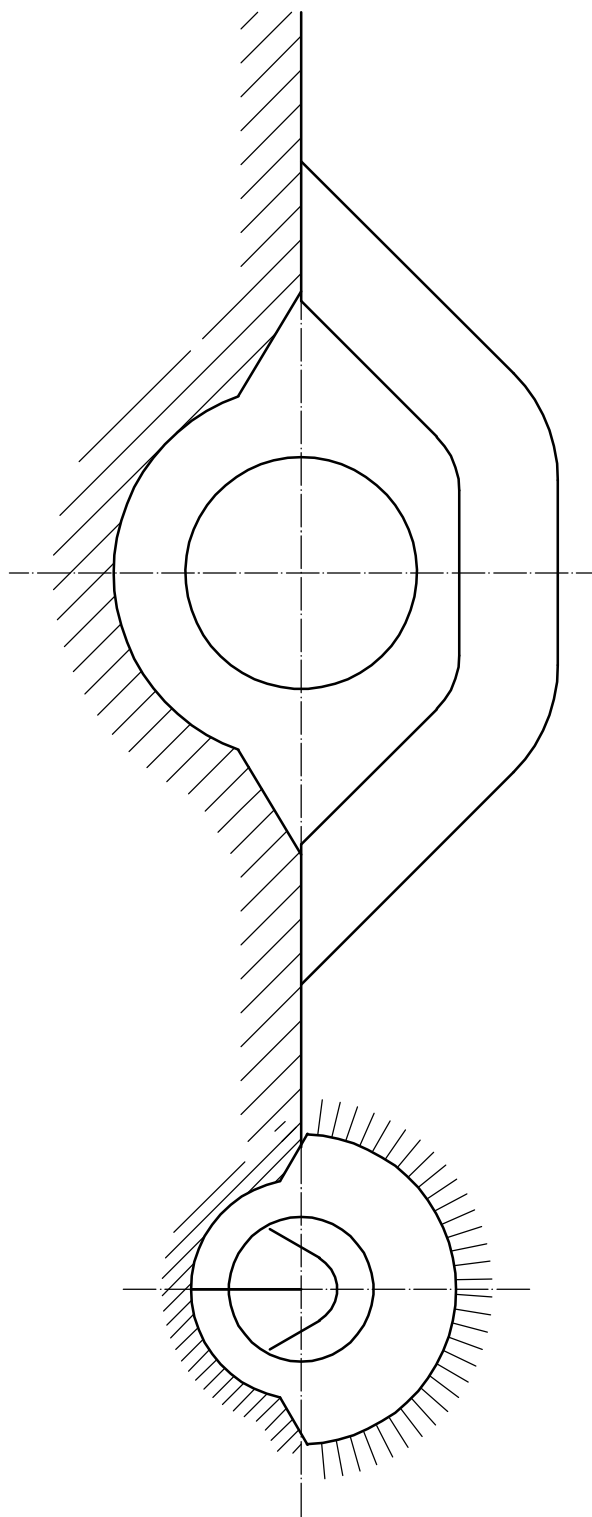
Combined clearance zone for 80 mm ball-type coupling device and connecting point(s) of tractor (50 mm ball) — Top view
